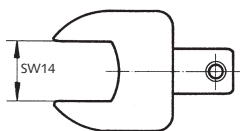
Fork wrench insert SW14 for mounting and torque wrench Typ 1300A71
